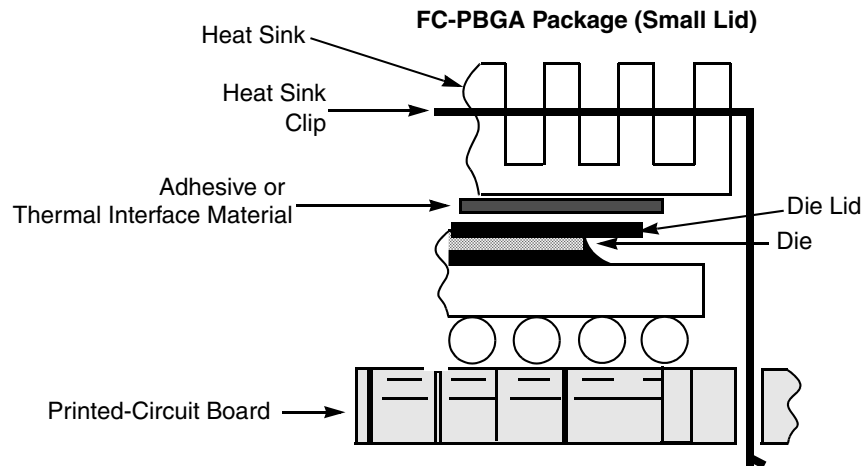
Package Exploded Cross-Sectional View—FC-PBGA (w/ Lid) Package
